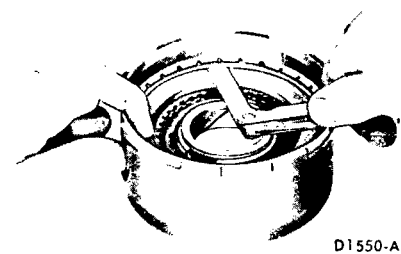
Checking Reverse-High Clutch Snap Ring Clearance
